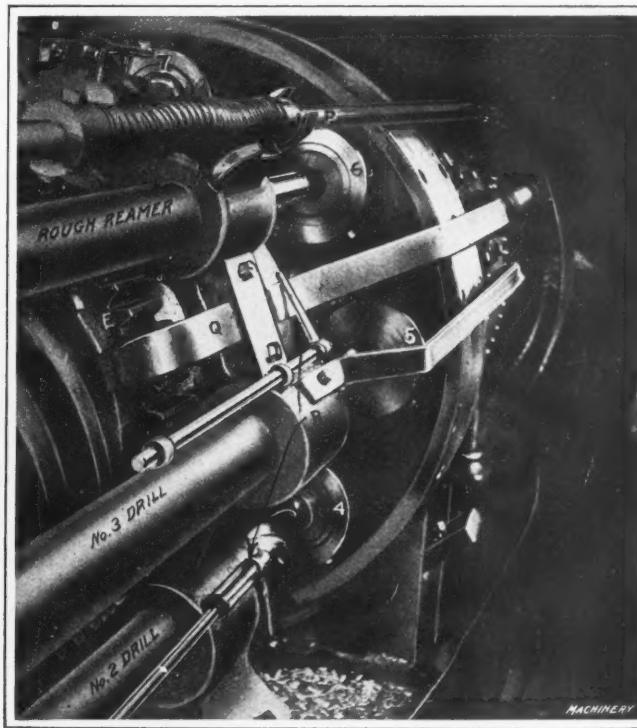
Close View of Machine shown in Fig. 1, illustrating Fourth, Fifth, Sixth and Seventh Operating Positions
